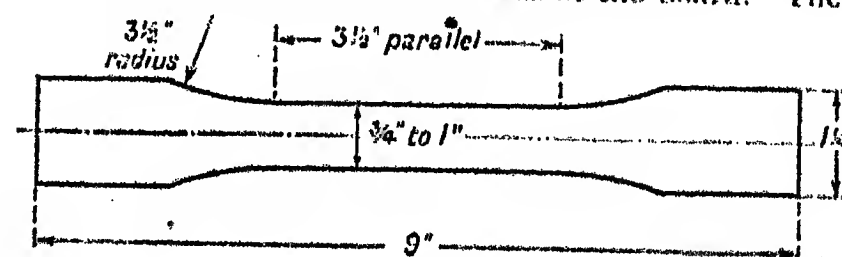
Specimen for Tensile Strength and Extension Tests on Boards.
